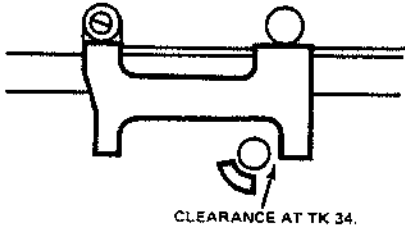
CARRIAGE LIMITER CLEARANCE
